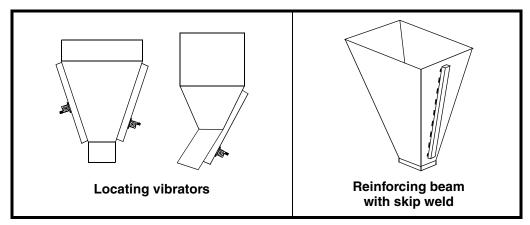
Locating Vibrators and Reinforcing Beams on Hoppers
